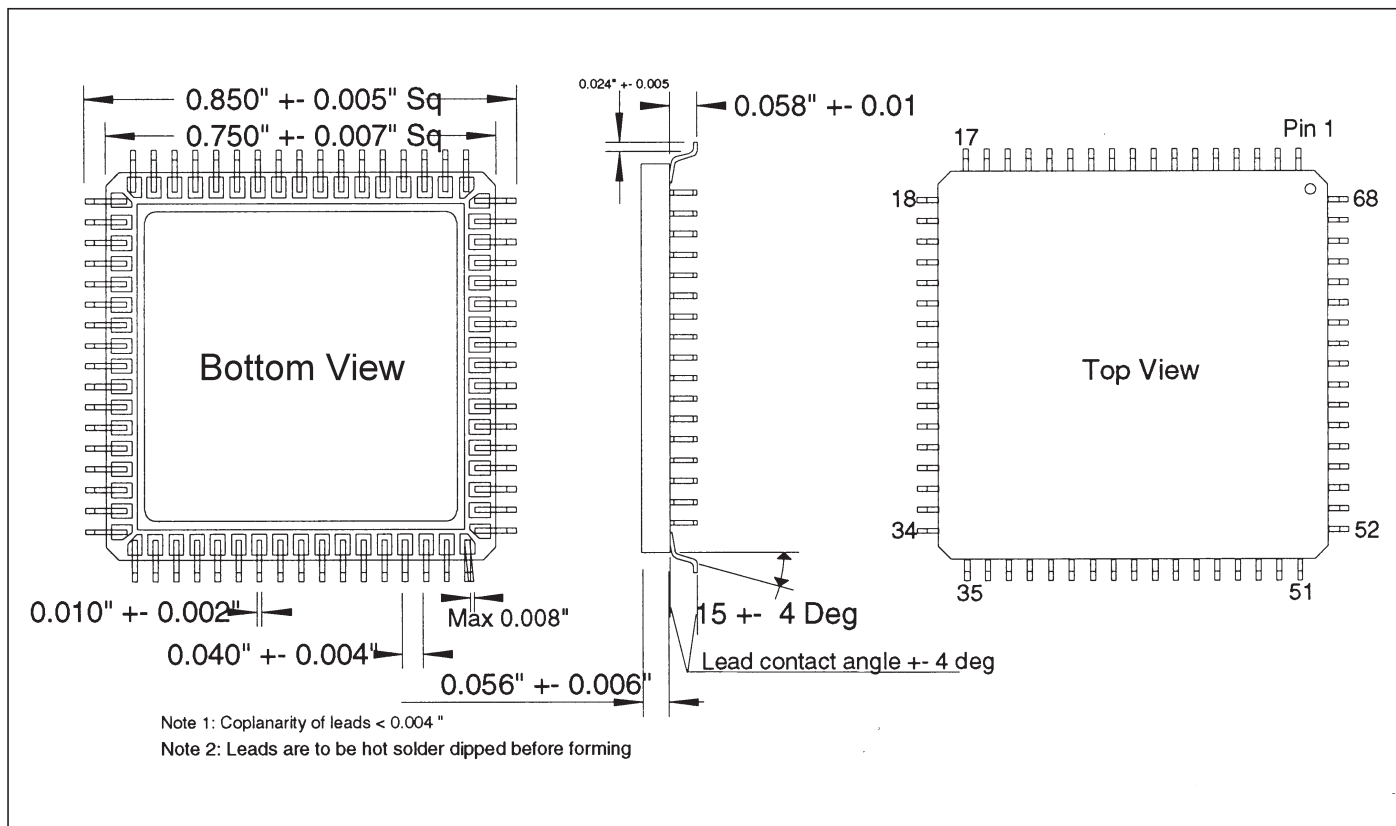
Package 68 pin MLC, Gullwings Leads. All dimensions are in inch.
